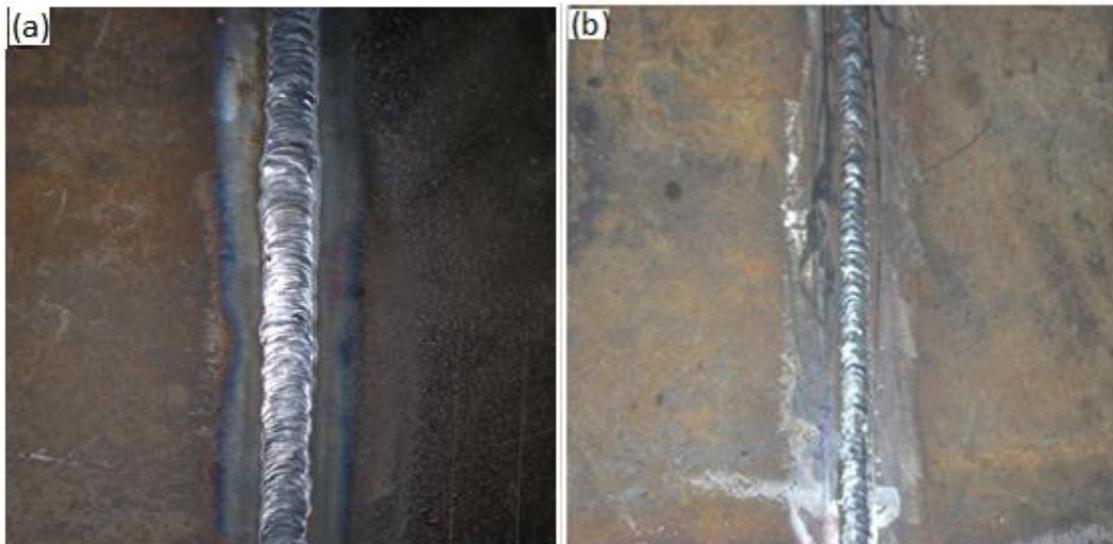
DMR 249A steel welds made with (a). SMAW and (b). GTAW
